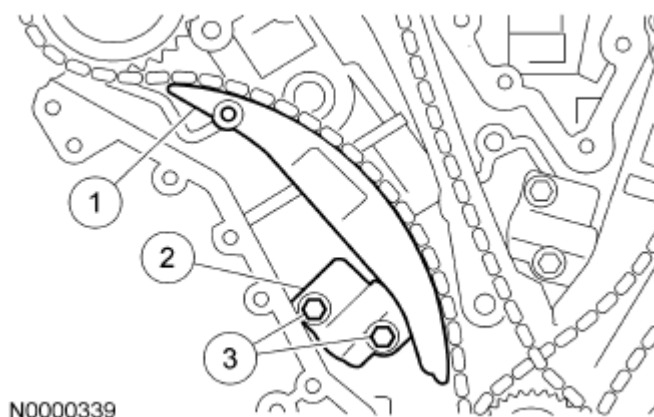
Identifying RH Timing Chain Tensioner And Tensioner Arm
